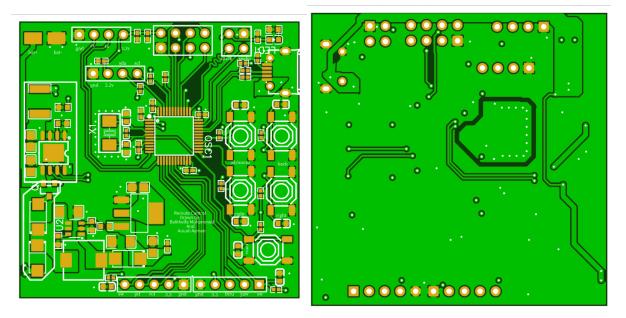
2D Pcb Remote control Top And Bottom View
